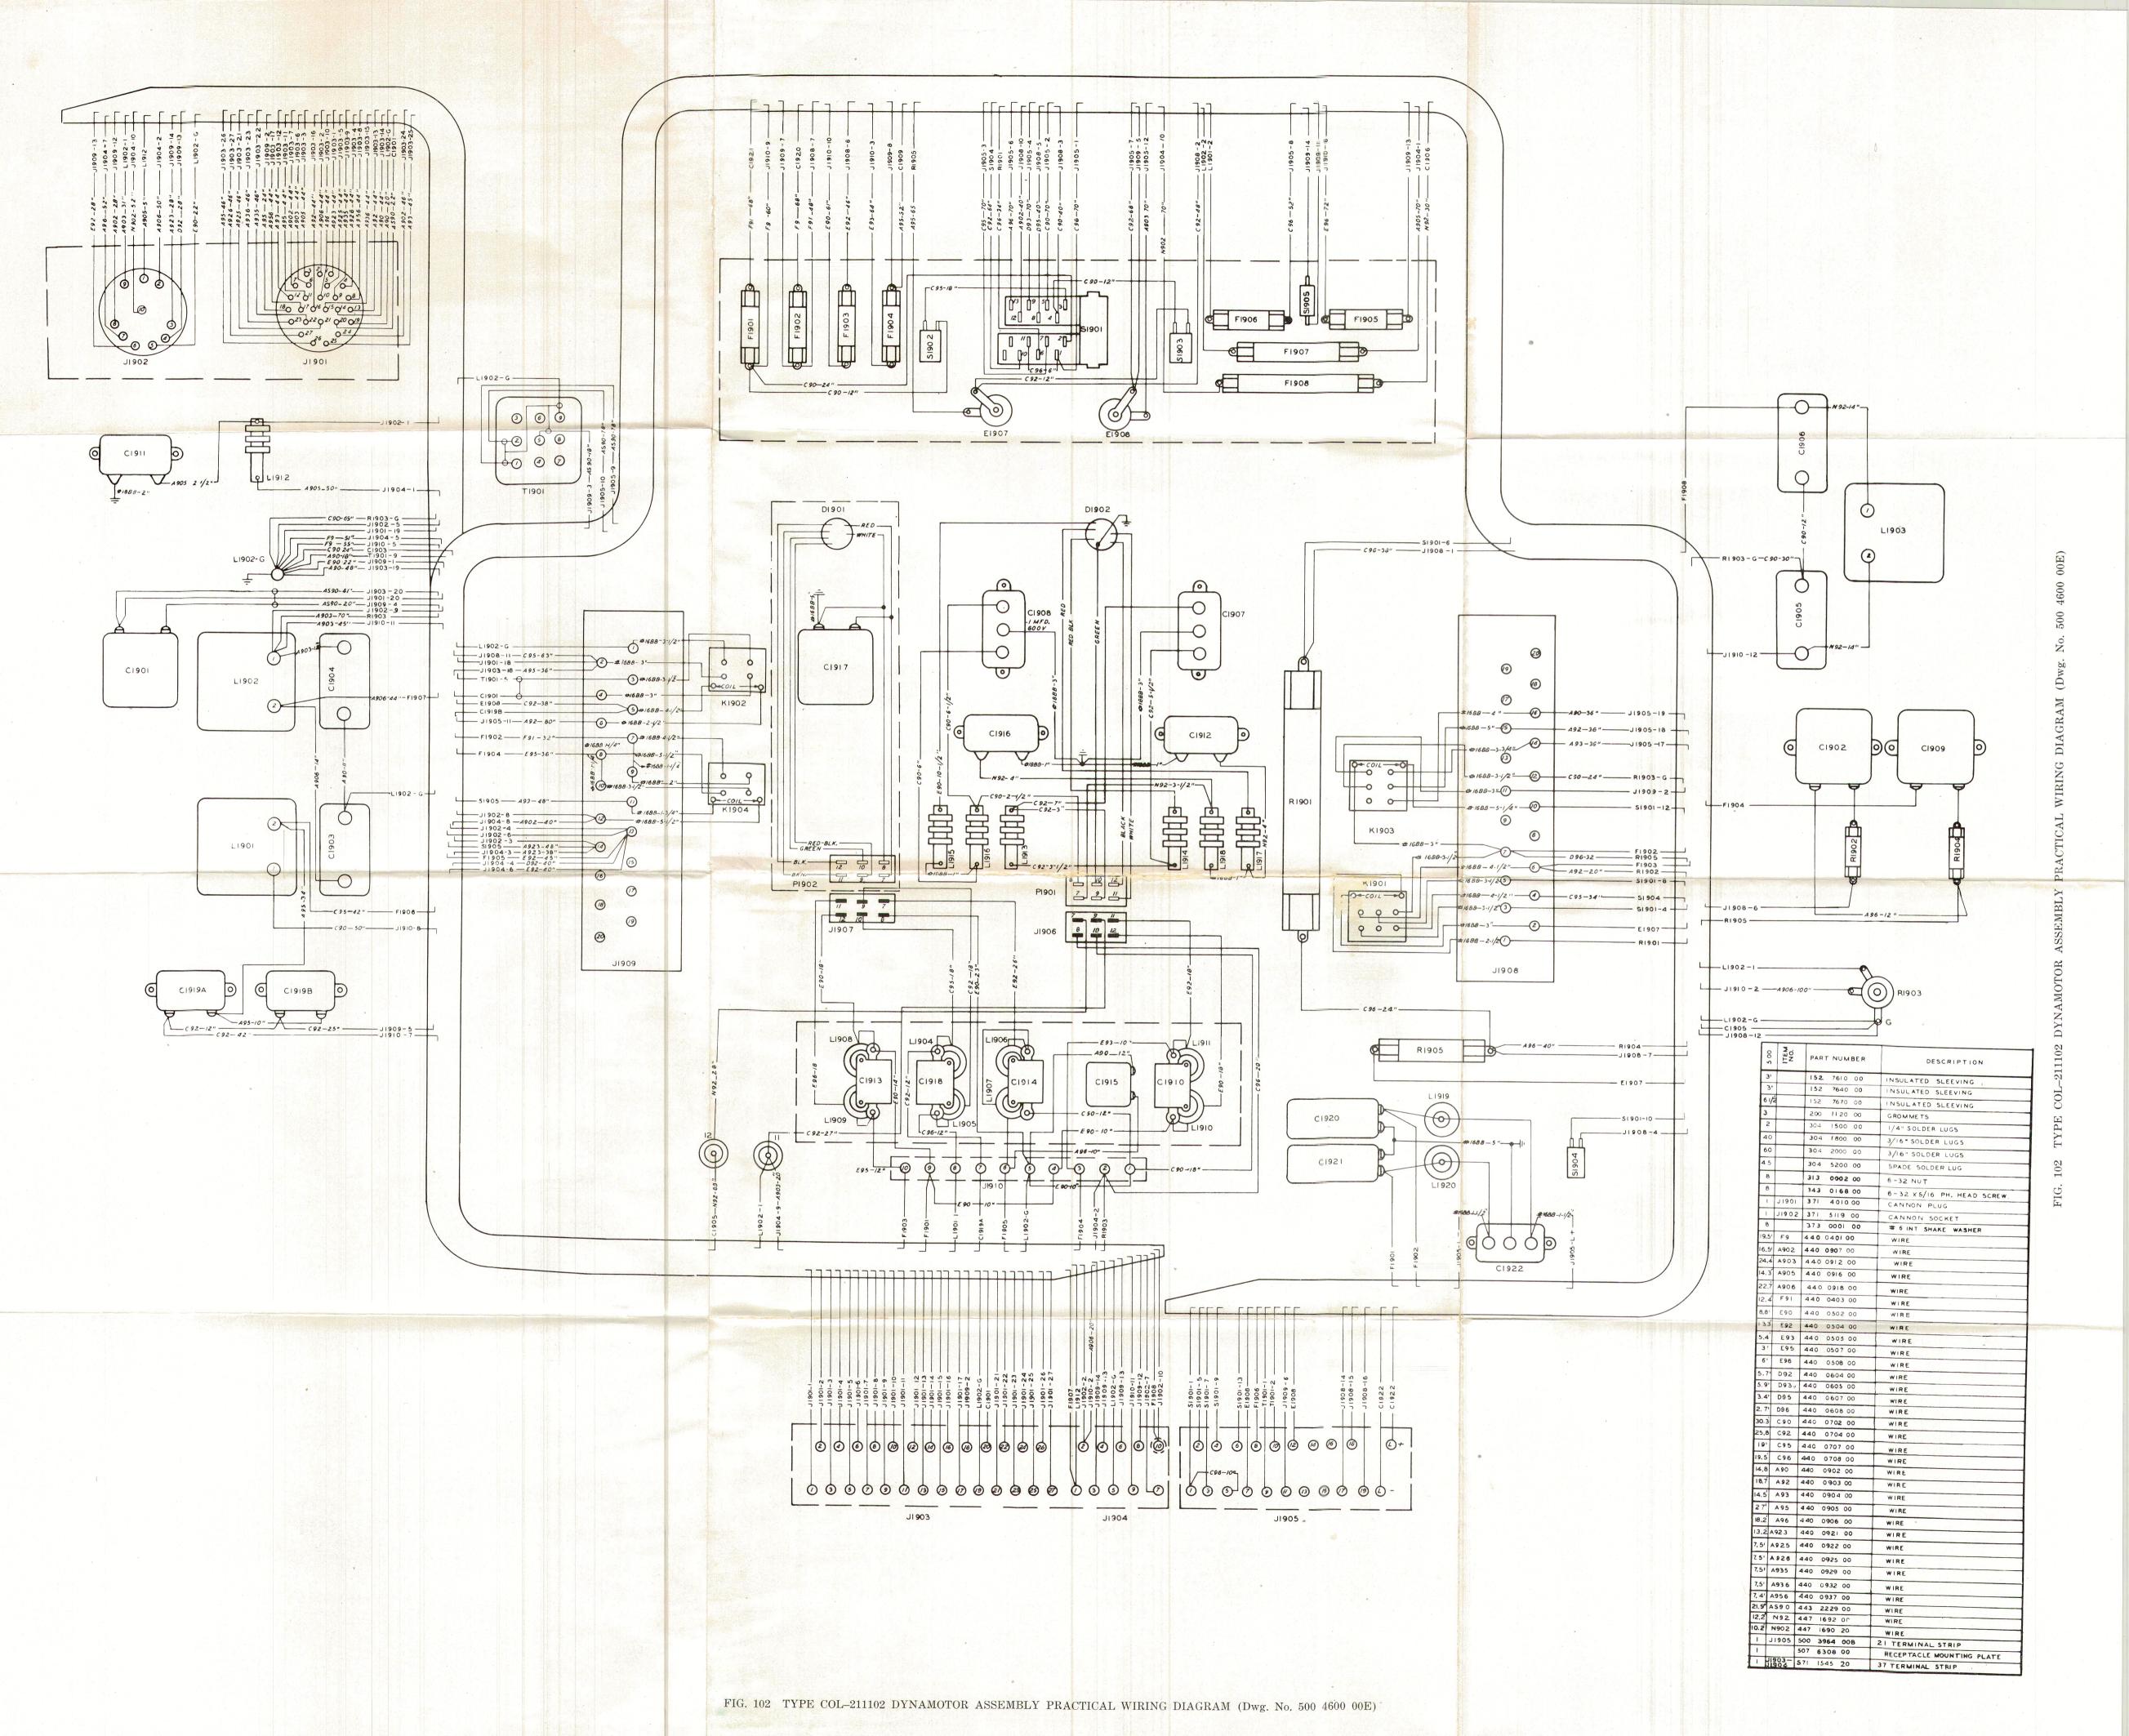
Type COL-211102 Dynamotor Assembly Practical Wiring Diagram (Dwg. No. 500 4600 00E)
